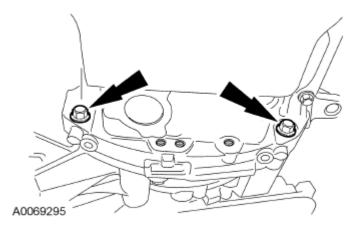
Locating Transaxle-To-Engine Bolts Courtesy of FORD MOTOR CO.
